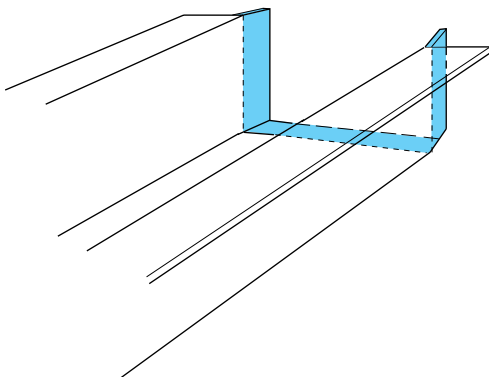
Step Tabs Inward on the New Rail Section
